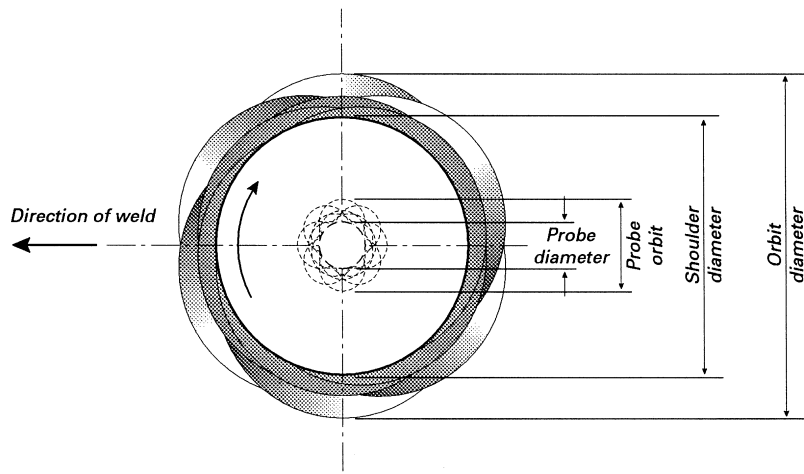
Dynamic orbit—plan view of rotating tool and probe
